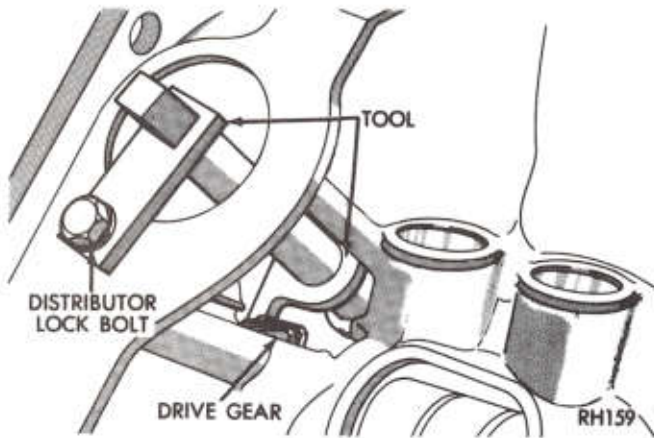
Camshaft Holding Tool C-3509 in Installed Position
